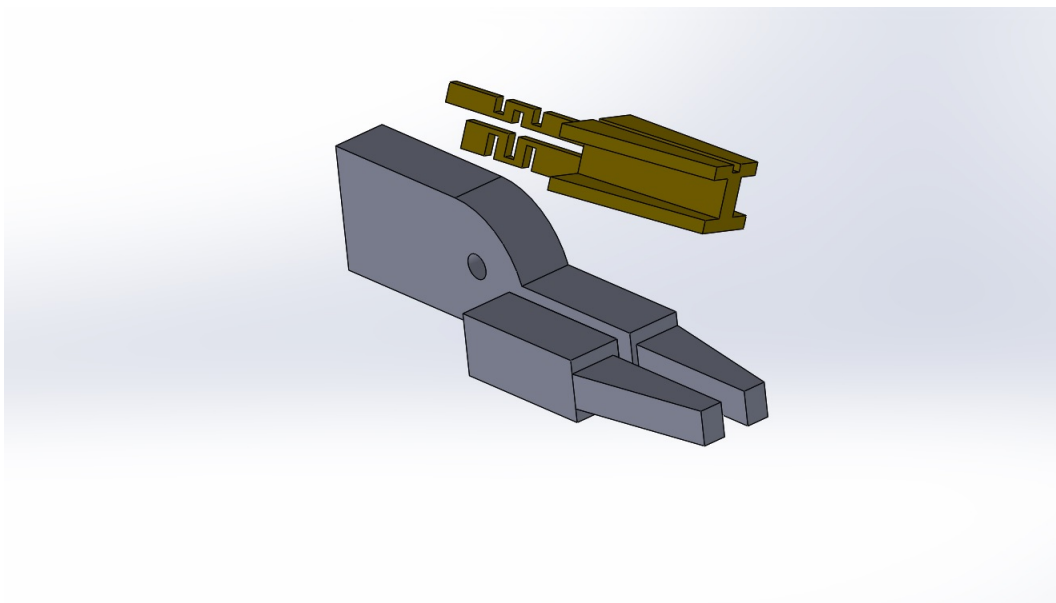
Expanded view of the 2nd prototype of the sensorized grasper
